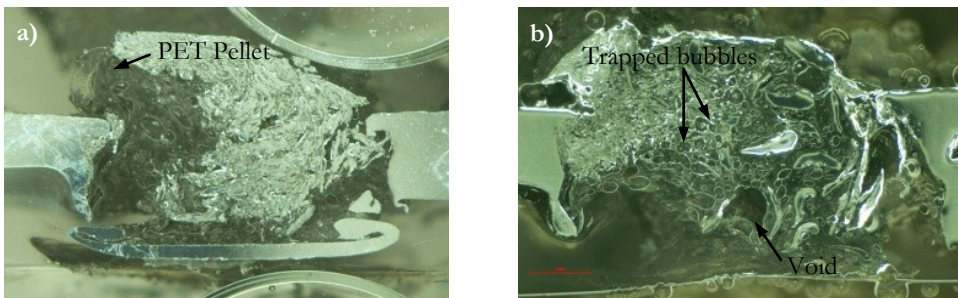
Photographs of AA5754-PET joint cross sections and surface appearance. a) Joint welded with 1500 rpm, 20 cm/min b) surface appearance of joint welded by 1500 rpm, 20 cm/min.
